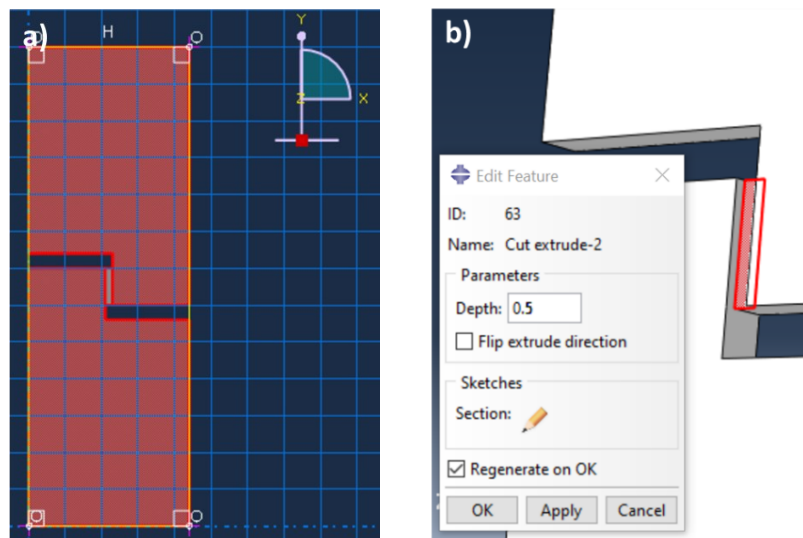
(a) Preliminary sketch of the Shear (in tension) specimen; (b) close-up at the milled gage section.
